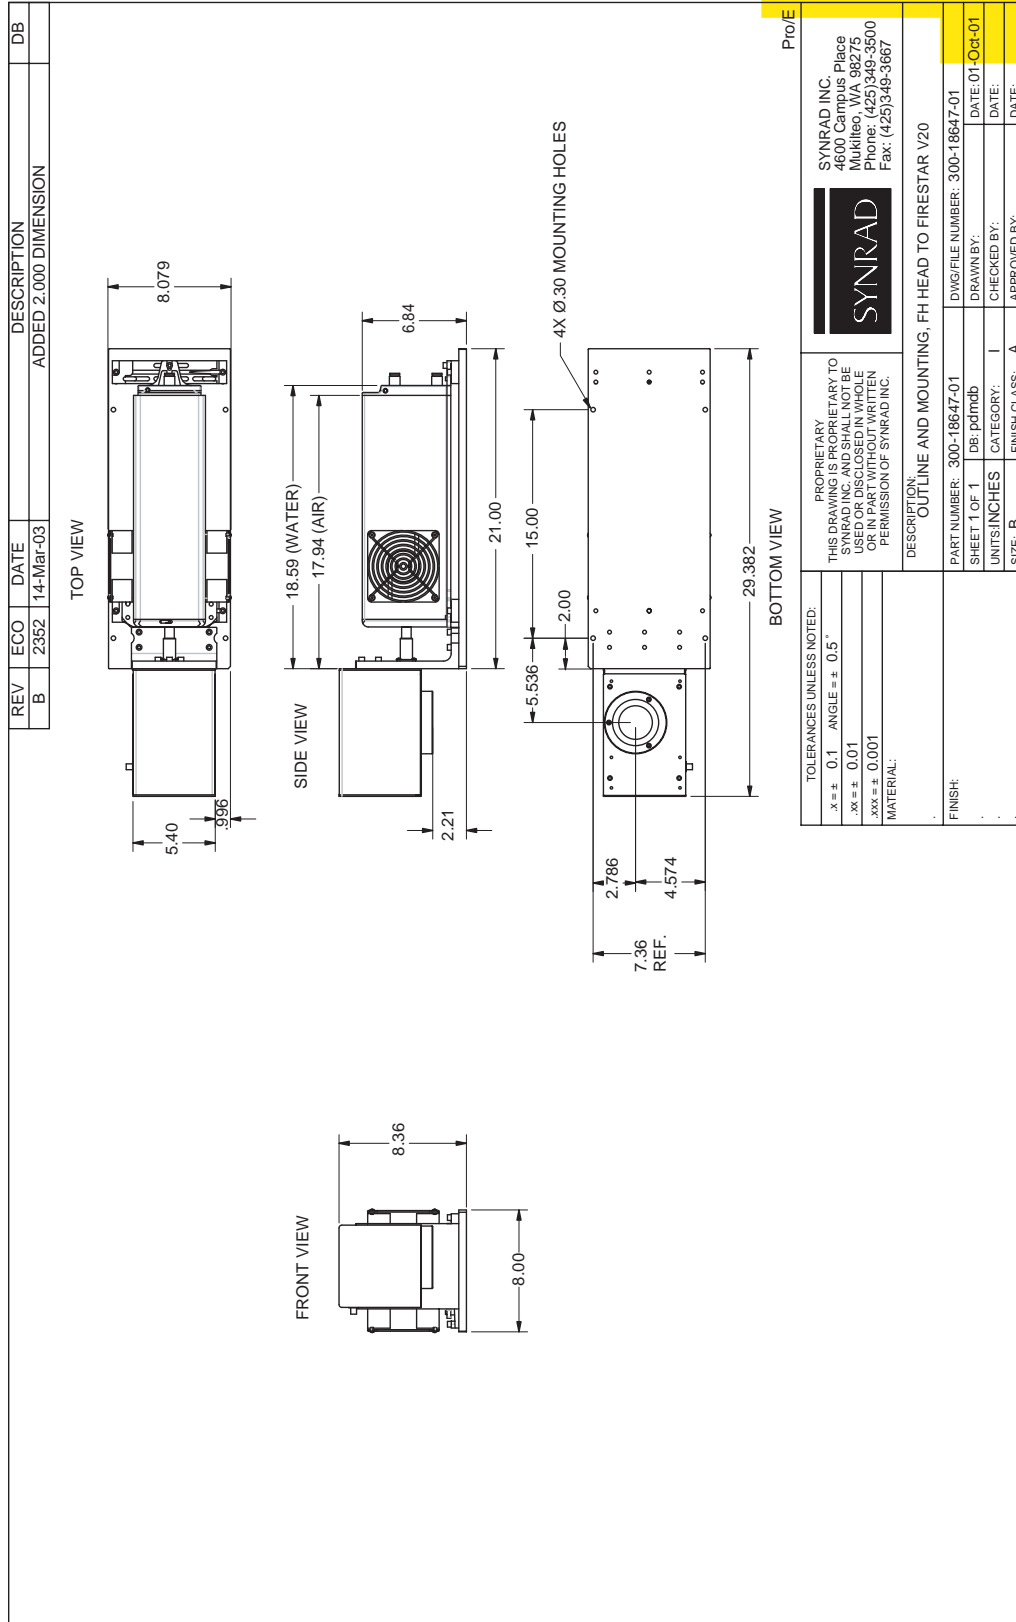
FH Head / Firestar v20 package outline and mounting dimensions
